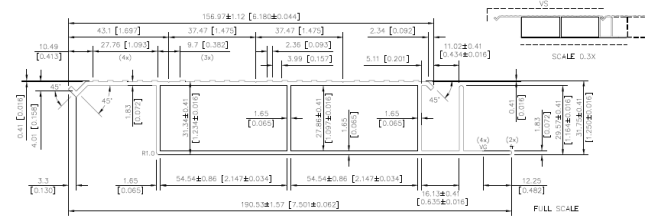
M.C.M.E.L EXCLUSIVE OPEN BOARDS
